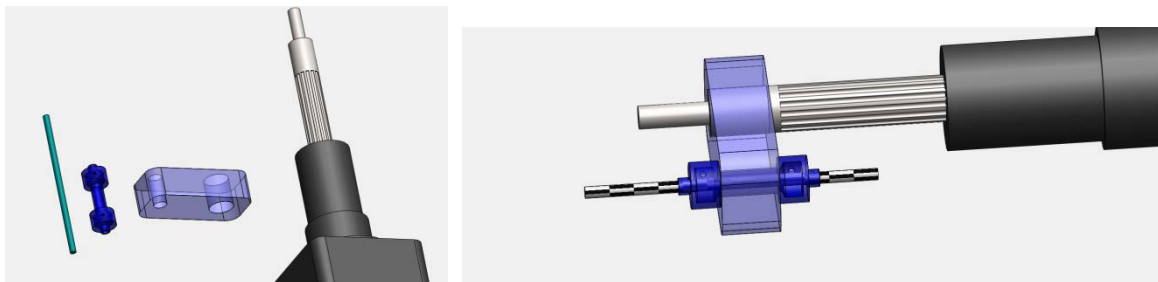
Components of focusing mechanism on the right hand side and the assembly on the left.
